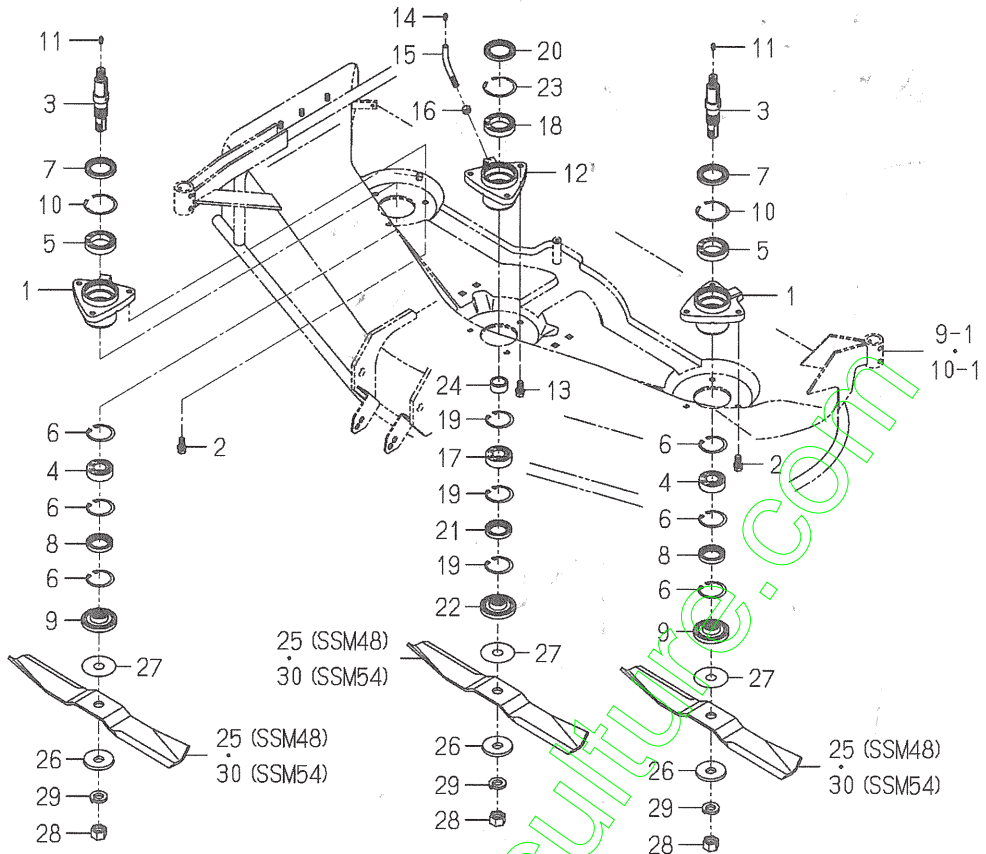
METAL, BLADE SYSTEM (SSM60)
